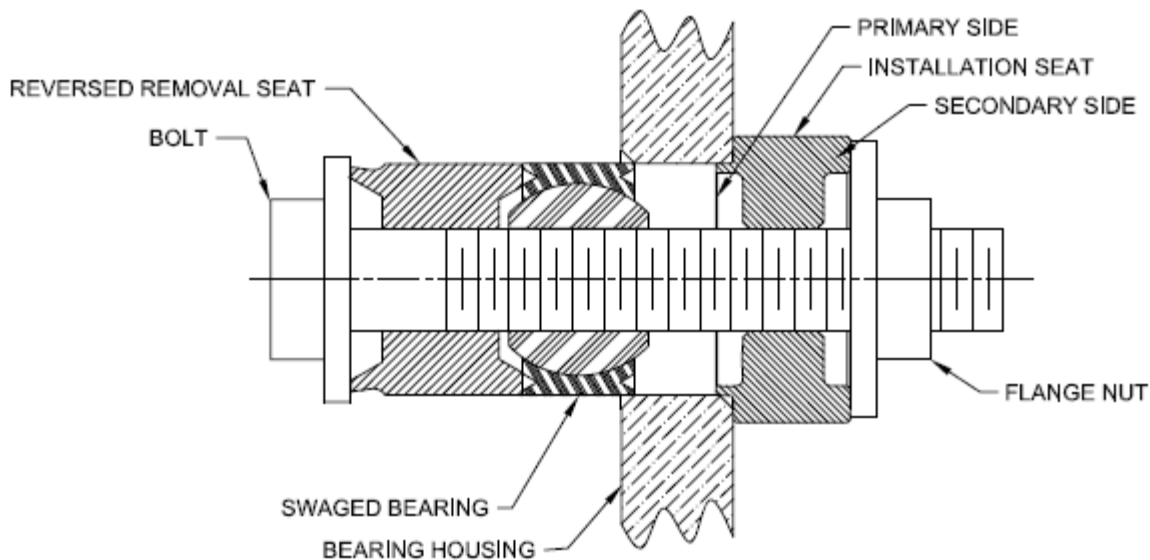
RBST##P PORTABLE BEARING SWAGING TOOL:
